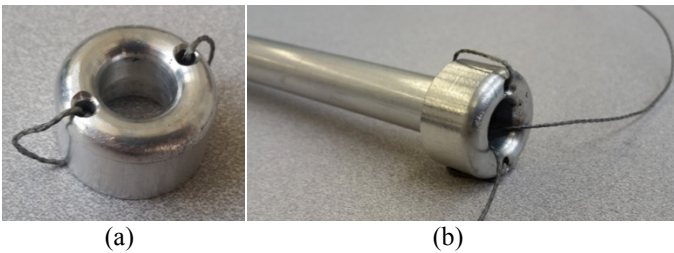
(a)THE MACHINED ALUMINUM ENDCAP. (b) CABLE ROUTED THROUGH THE MACHINED ENDCAP INSTALLED ON THE ALUMINUM TUBE.
